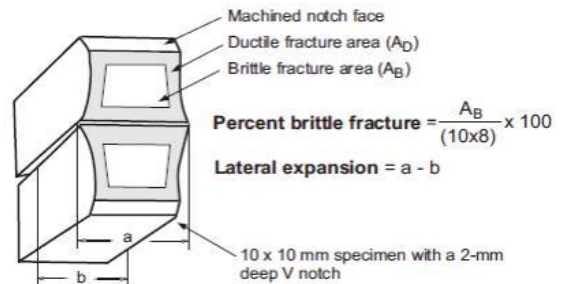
Shape of fracture appearance of Charpy impact specimen^[16]
